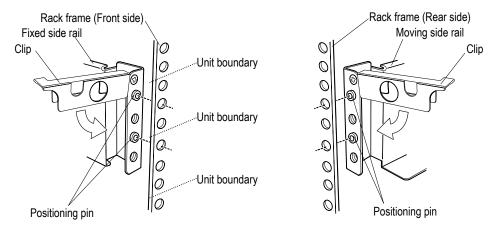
Installing rack rails for Additional Chassis (RKAKS)-2
